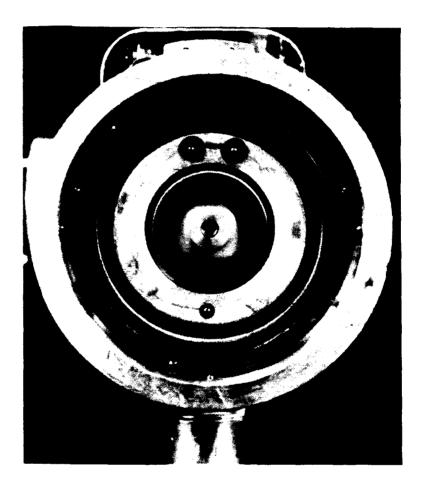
End View of Aeroquip Nozzle Showing Broken and Bent Pins
